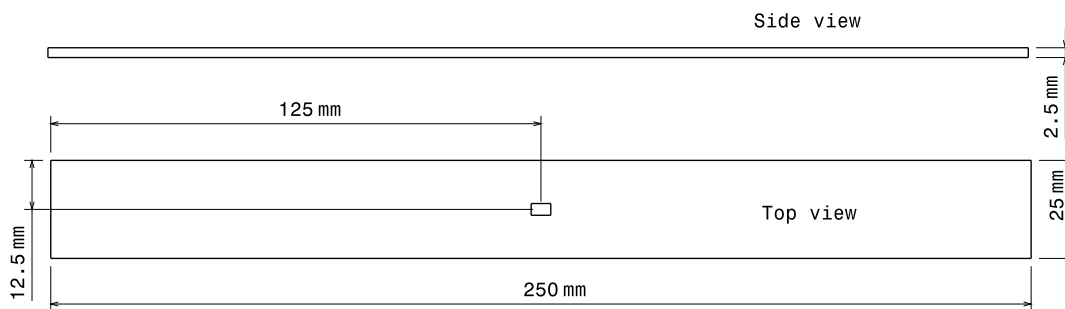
The dimensions and the strain gauge location of the in-plane shear specimens.
